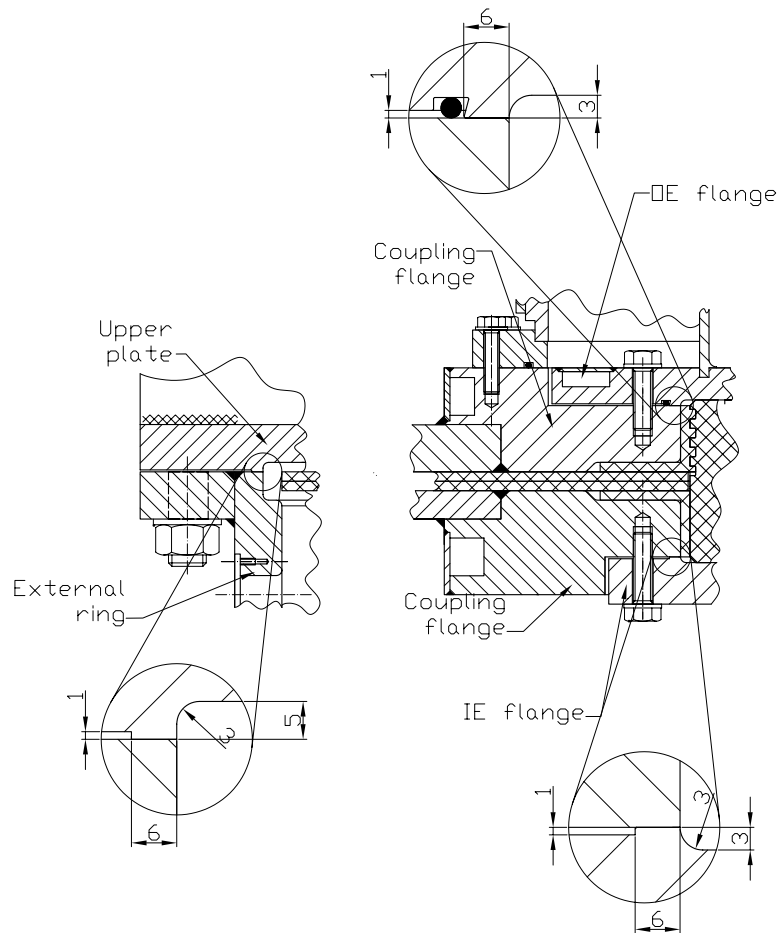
Assembly design details of the current-gaskets and edge roundings (dimensions in mm).
